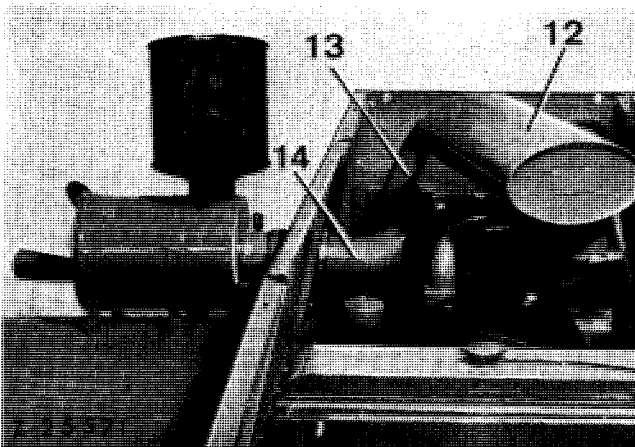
Preparing to Remove Engine (975 Combine Shown)
